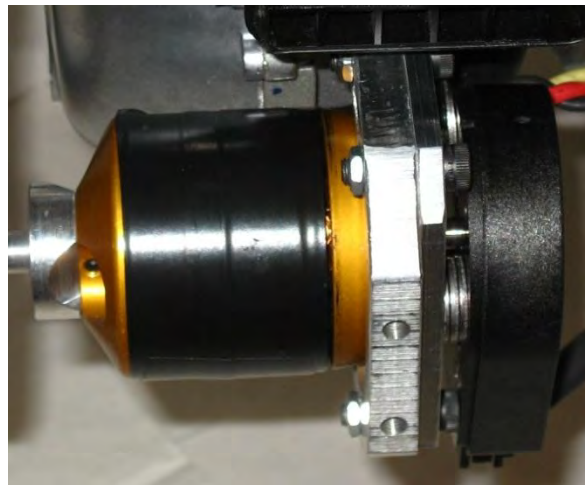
AXI 4130/20 mounted to motor plate and motor mount bracket, all attached to Honda GX25
